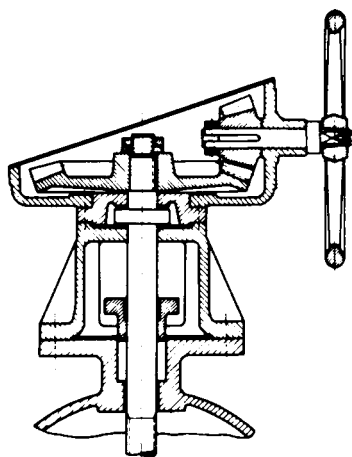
Bevel-gear gate-valve stem drive
